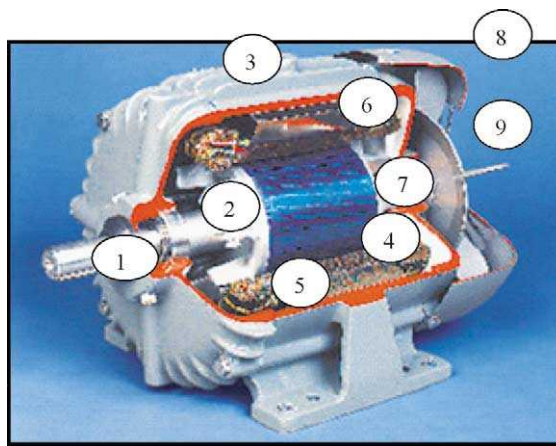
The structure of a TEFC squirrel-cage induction motor. (1) Shaft; (2) bearing; (3) frame; (4) stator coil; (5) end winding; (6) stator core; (7) rotor; (8) end cap; (9) fan.
